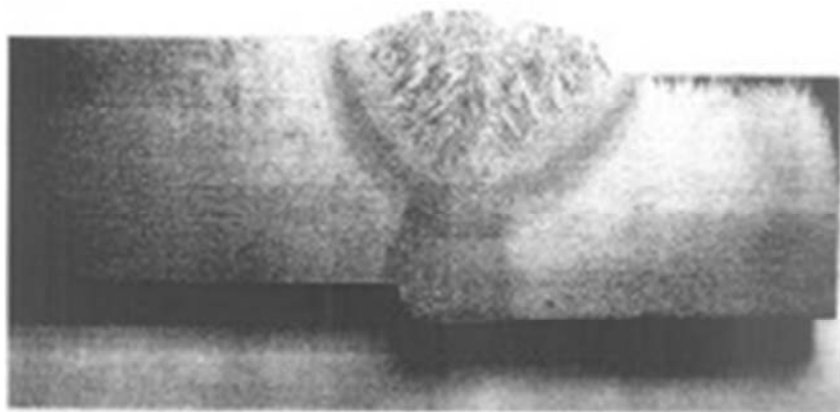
Makrošlif welded joint made of combination welding.
